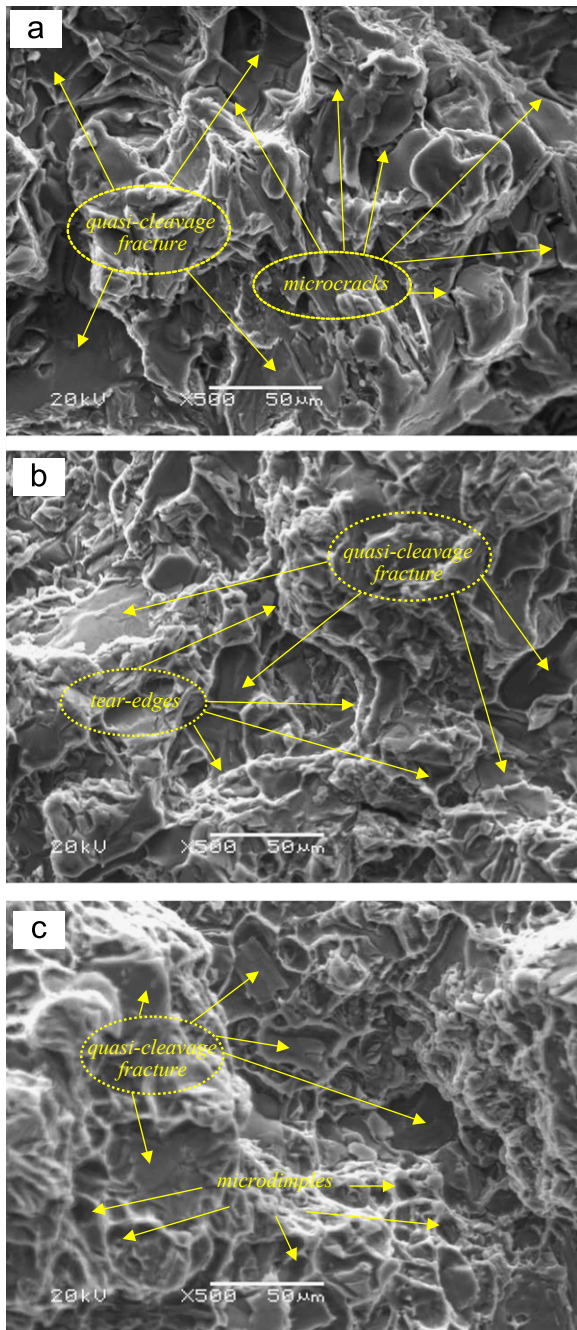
Fracture surface morphology of the Al-12Si-CuNiMg alloy after 0.2% fatigue test at: (a) 200, (b) 350, and (c) 400 °C.
